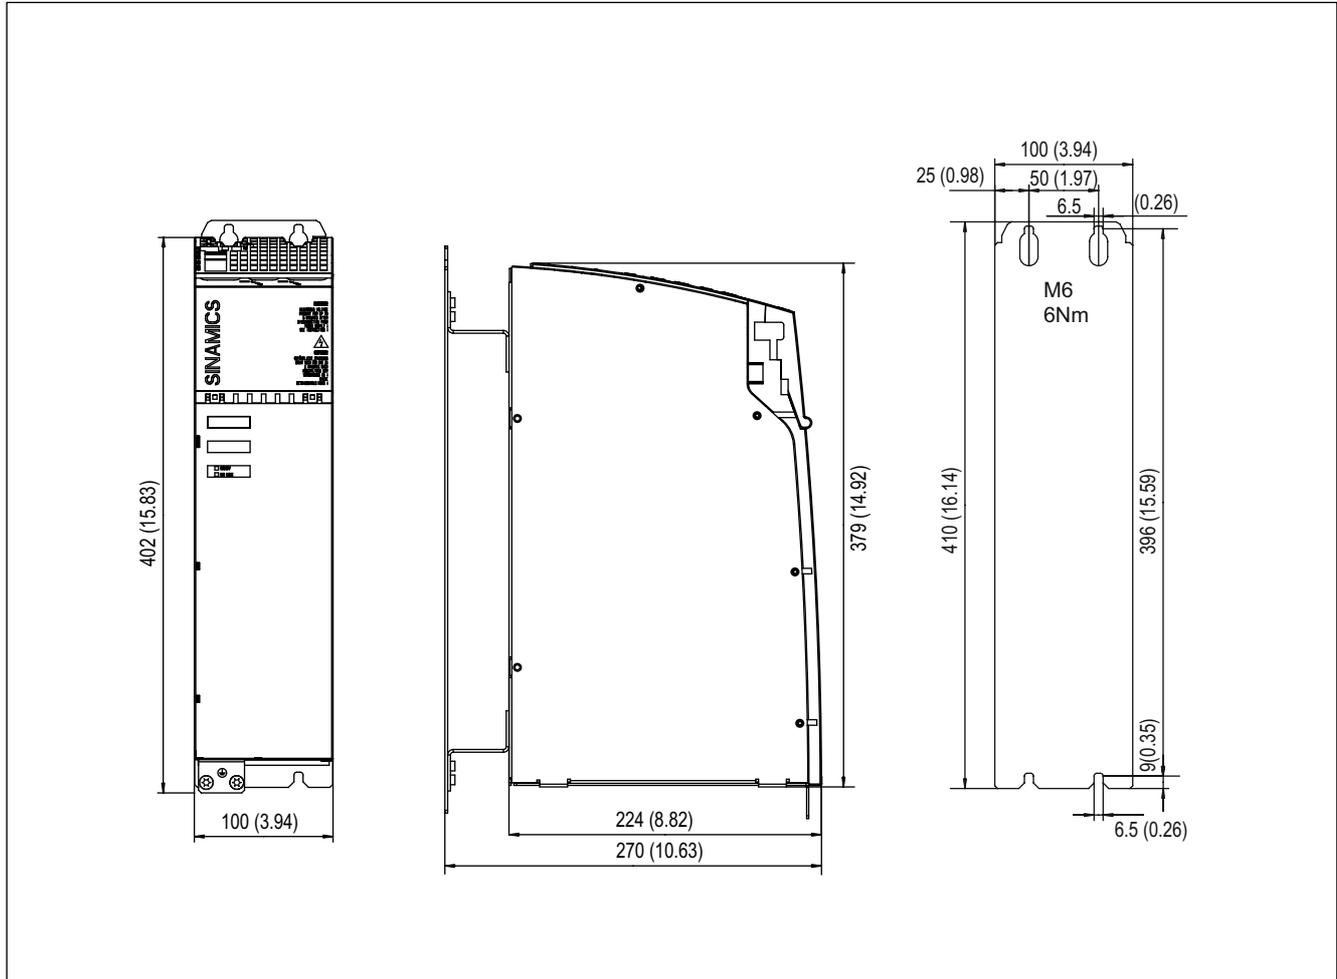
Dimension drawing of Capacitor Module, all dimensions in mm and (inches)
